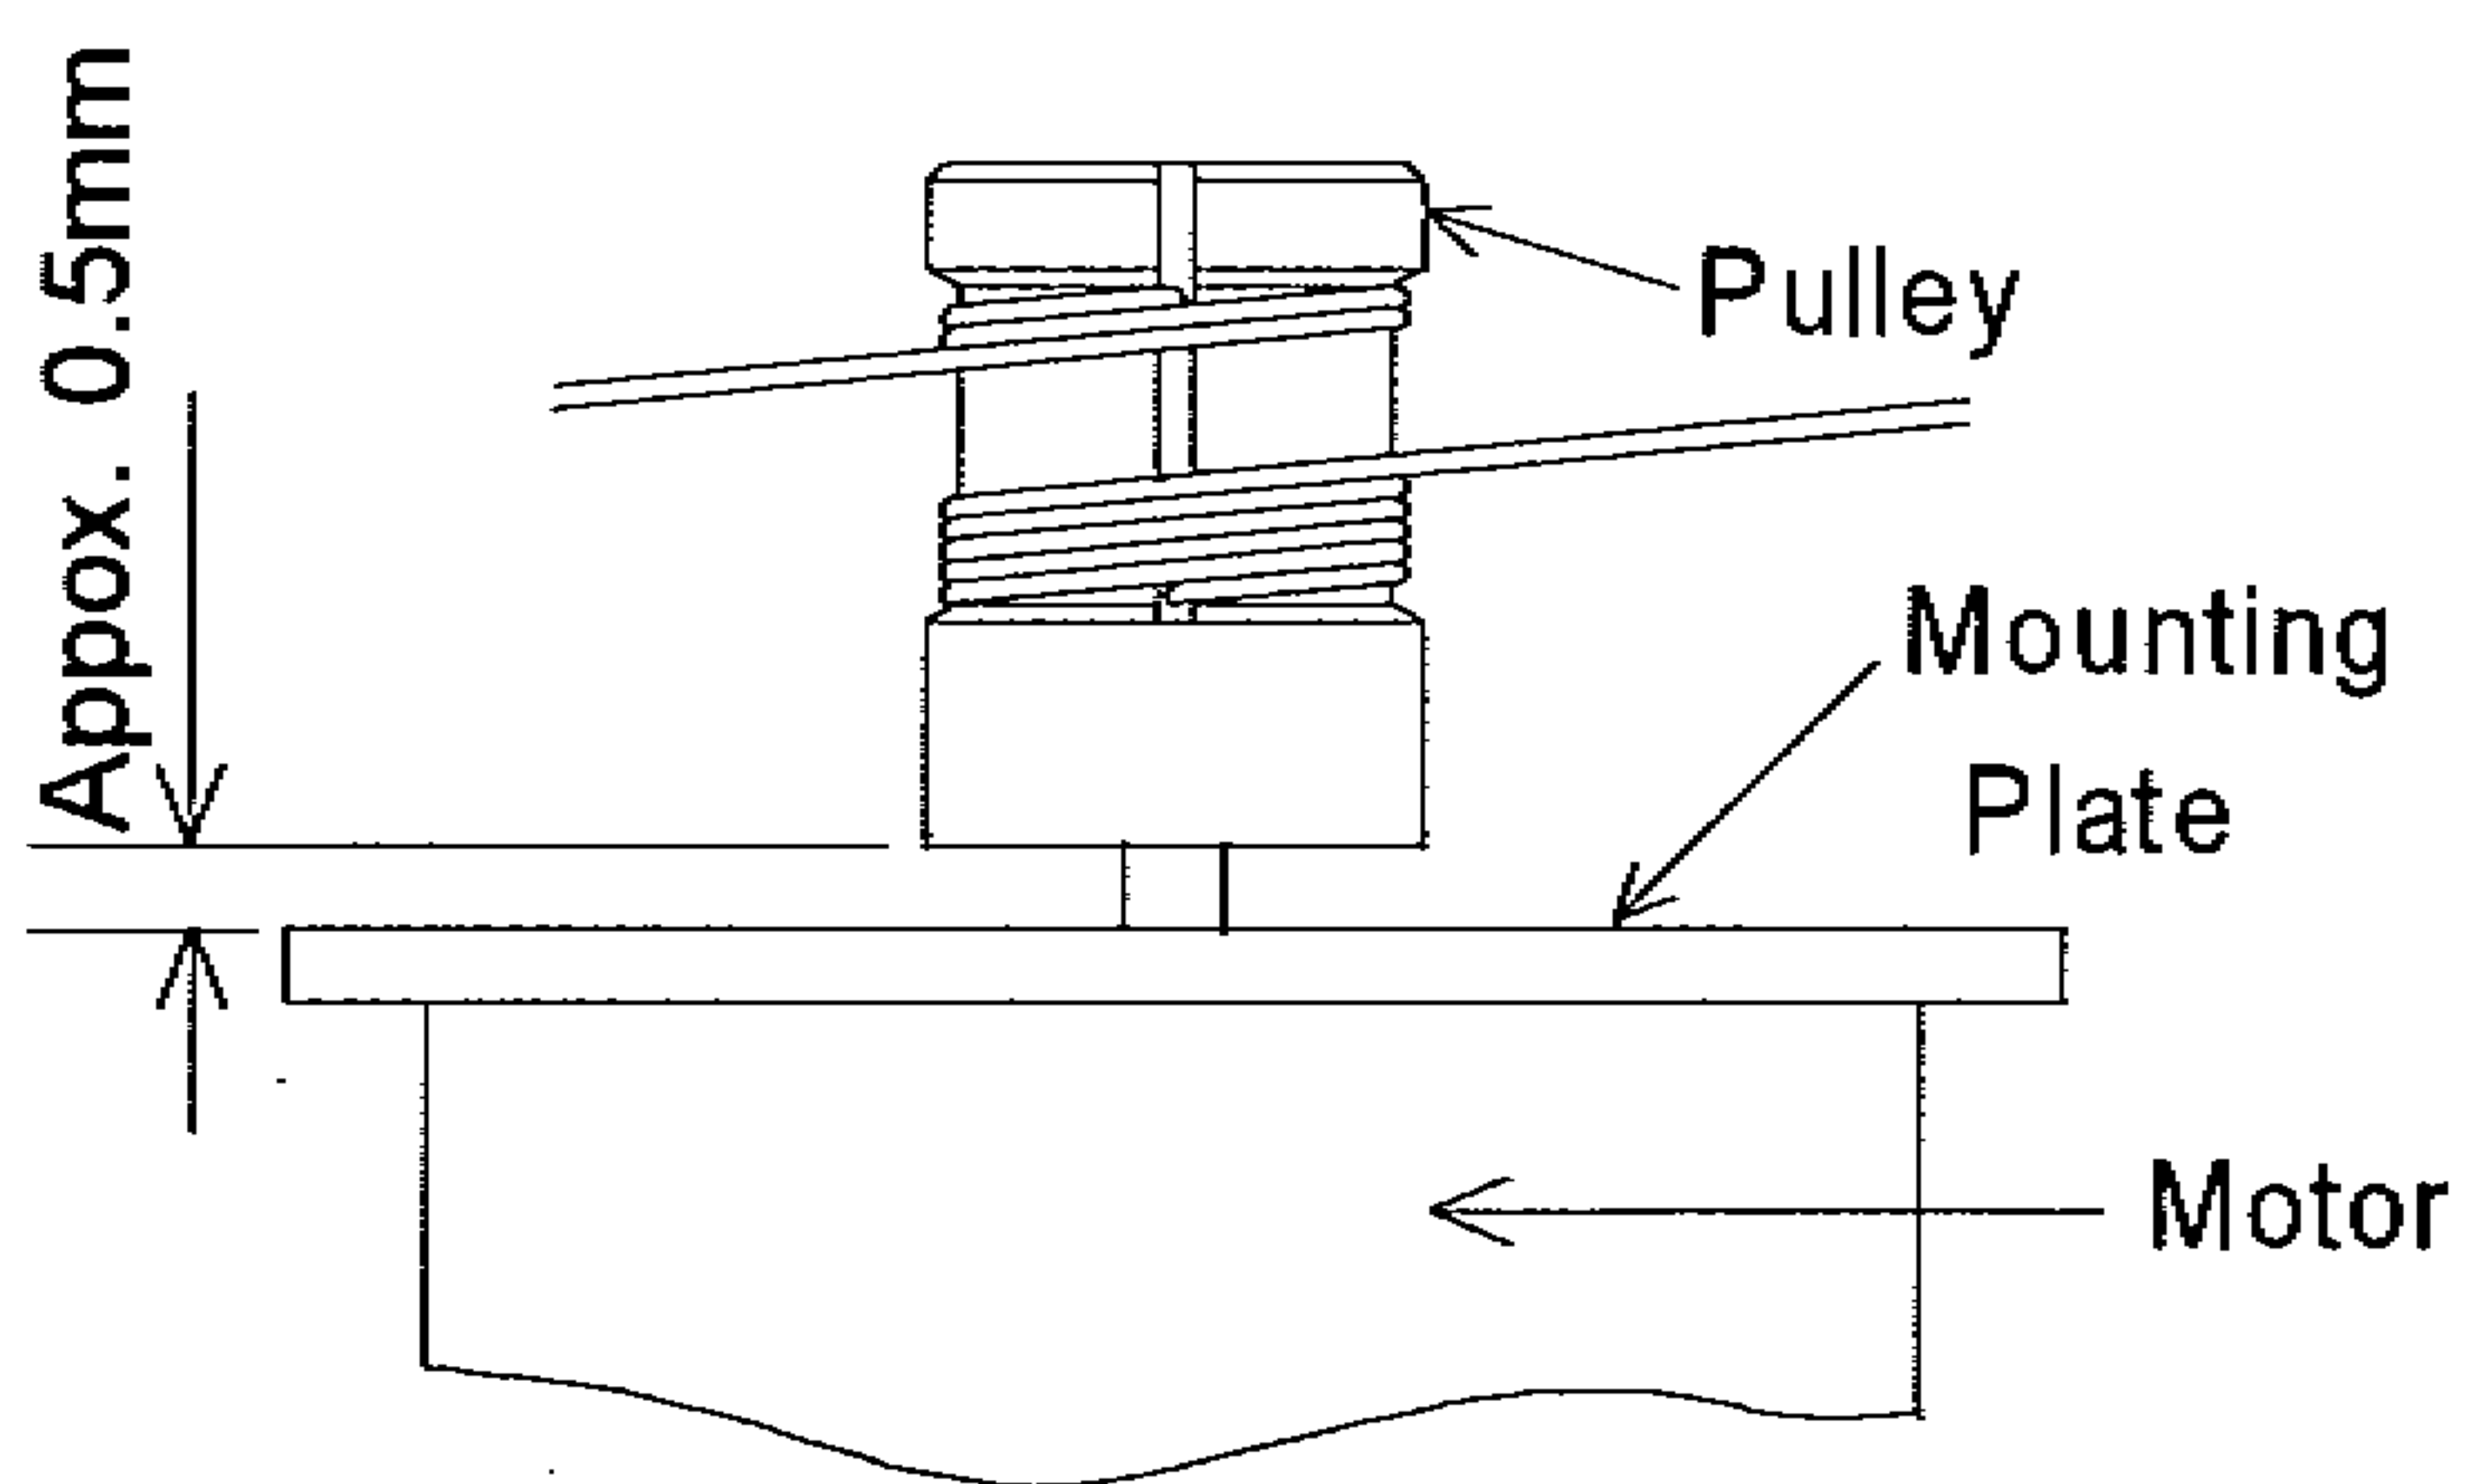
Attaching the Pulley onto the Motor (Side View)
